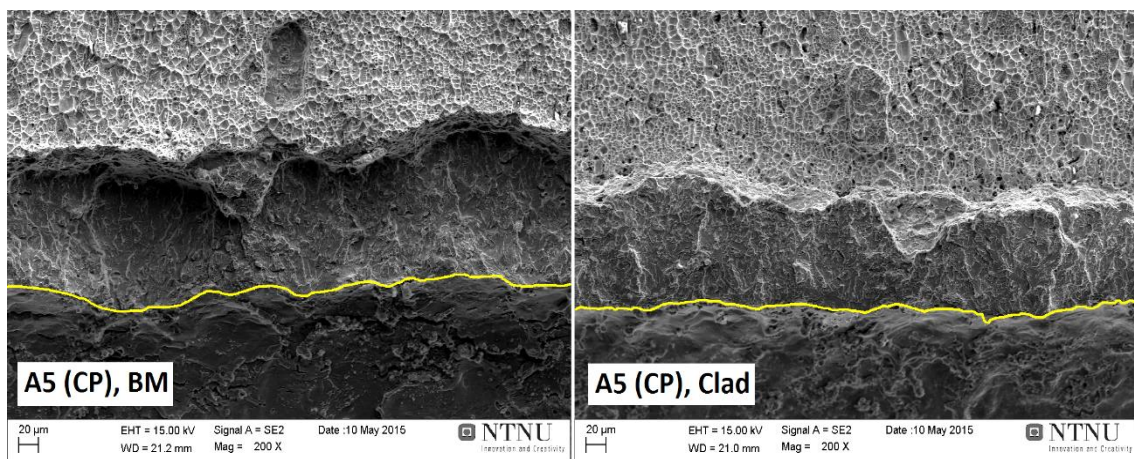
Fracture surface of BM side and clad section of specimen for A5 (CP).
